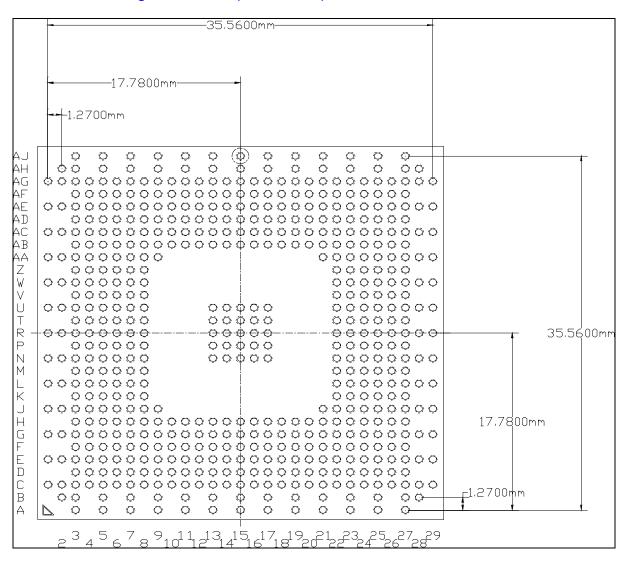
MCH-M BGA Package Dimensions (Bottom View)
